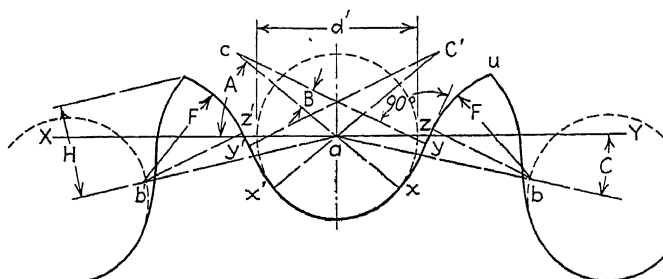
Design of standard sprocket tooth for roller chains. (Courtesy Diamond Chain and Manufacturing Company.)
